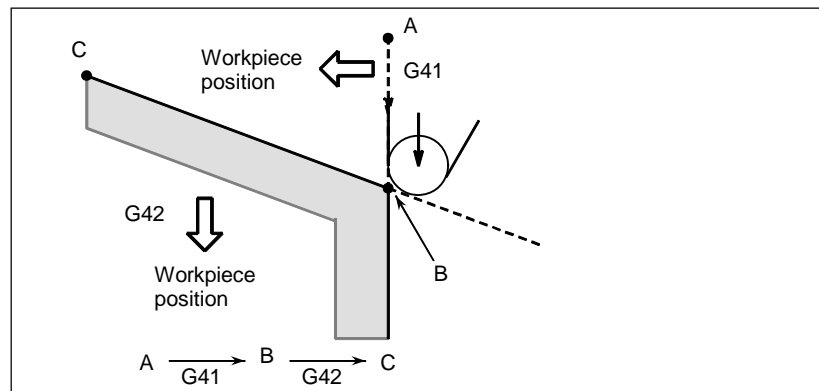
(d) Tool movement when the workpiece position changes
